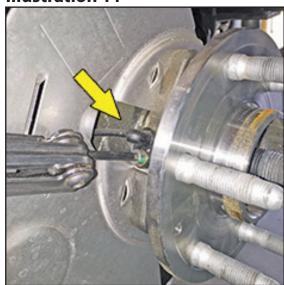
Unbolt and remove the ABS sensor from the hub assembly. {5mm allen}
